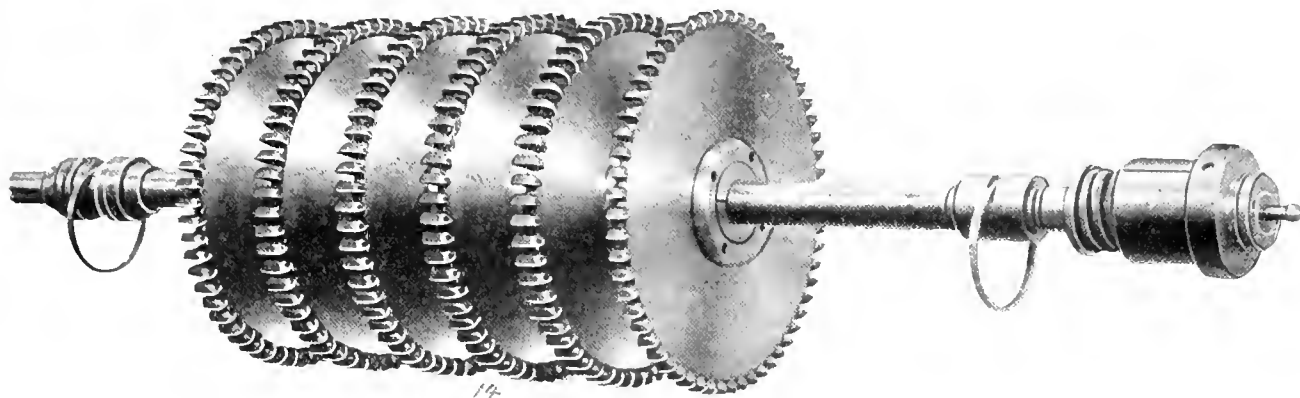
Assembled Rotor of Kerr Steam Turbine.
